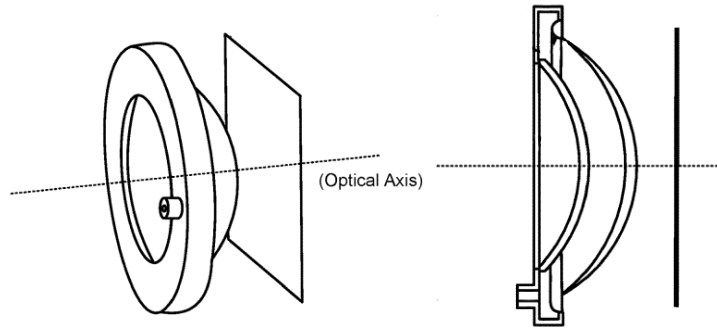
Vacuum pressure focusing technique with vacuum port [53].
